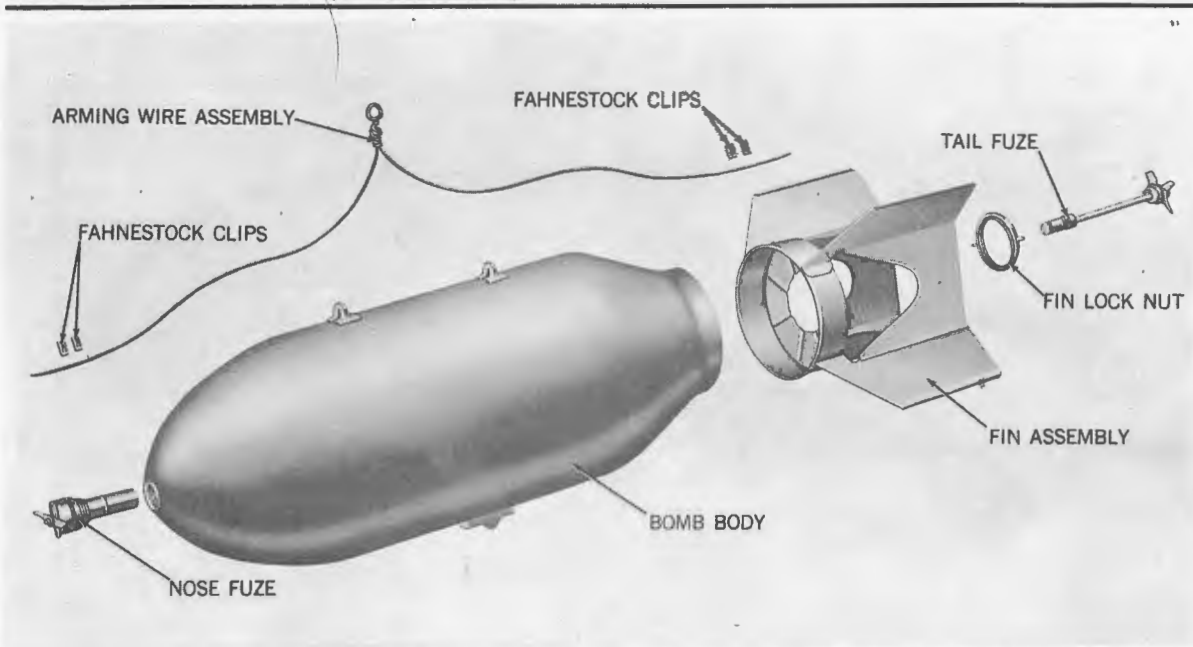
1000-lb GP Bomb AN-M65A1 with Fin Assembly AN-M113A1, Exploded View.
